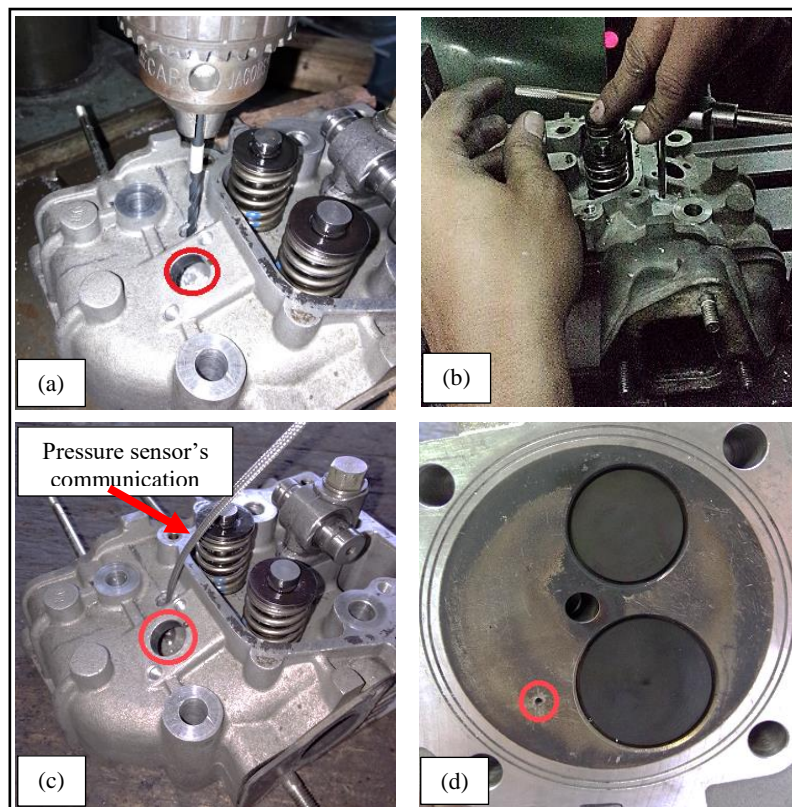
The photographic view of mounting the pressure sensor on the cylinder head: a) drilling a hole, b) making a thread, c) mounting a pressure sensor, and d) a hole for a pressure sensor tip
